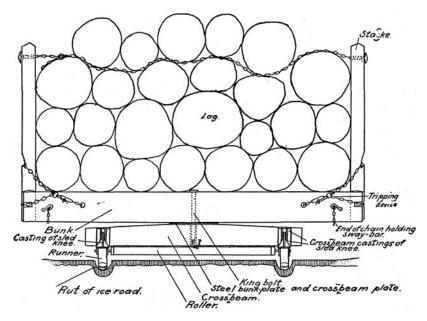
Rear View of The Heavy-duty Logging Sled shown in Fig. 26.
